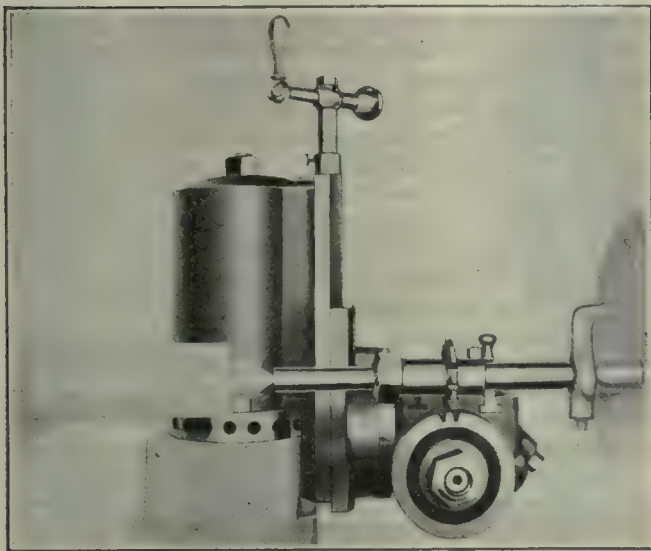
GARRETT "MILLERETTE" ON LATHE
